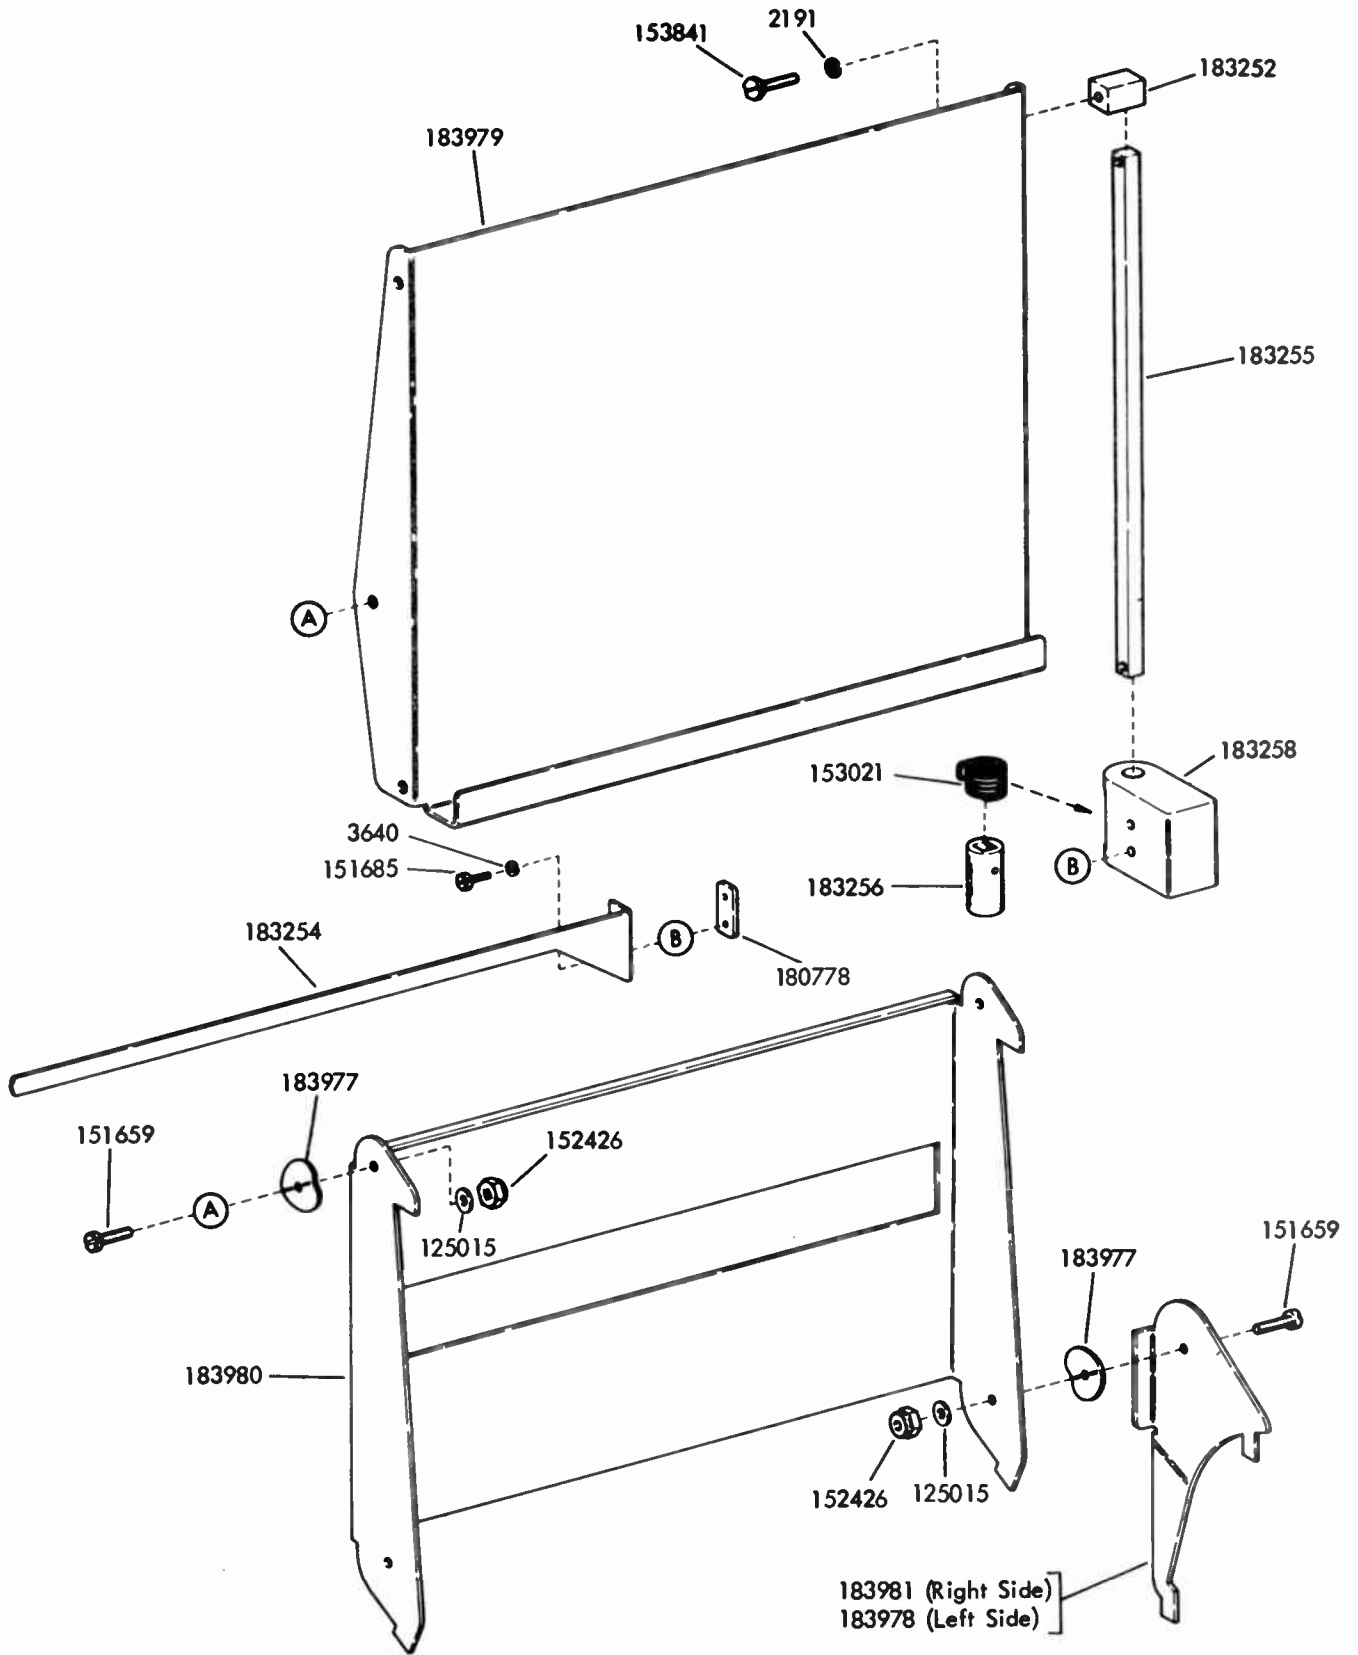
183976 ADJUSTABLE COPYHOLDER ASSEMBLY
